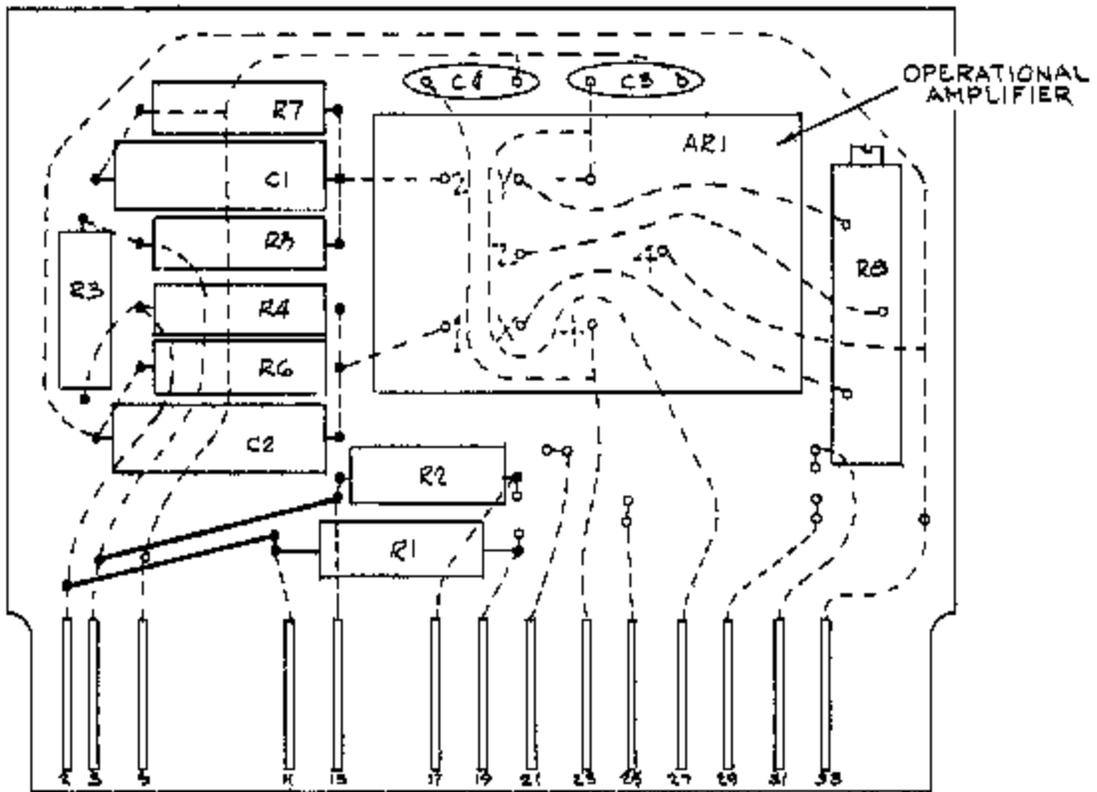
TYPICAL PRINTED CIRCUIT LAYOUT
